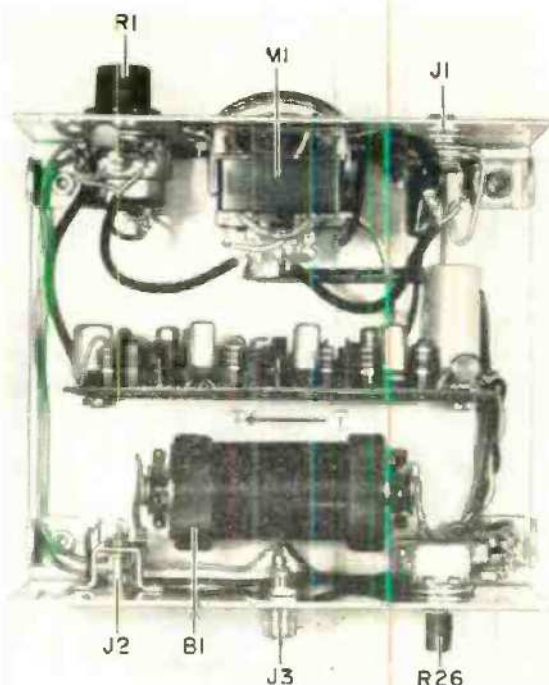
Although any method of installation may be used, this is a view of prototype.
